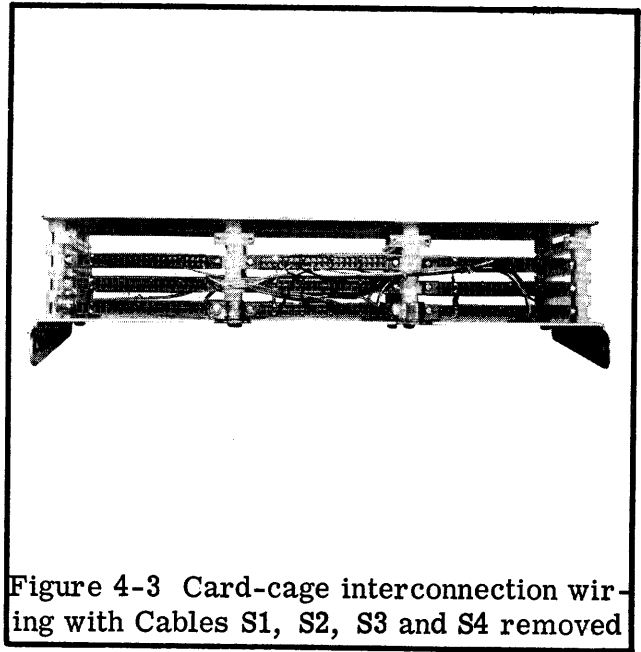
Card-cage interconnection wiring with Cables S1, S2, S3 and S4 removed
